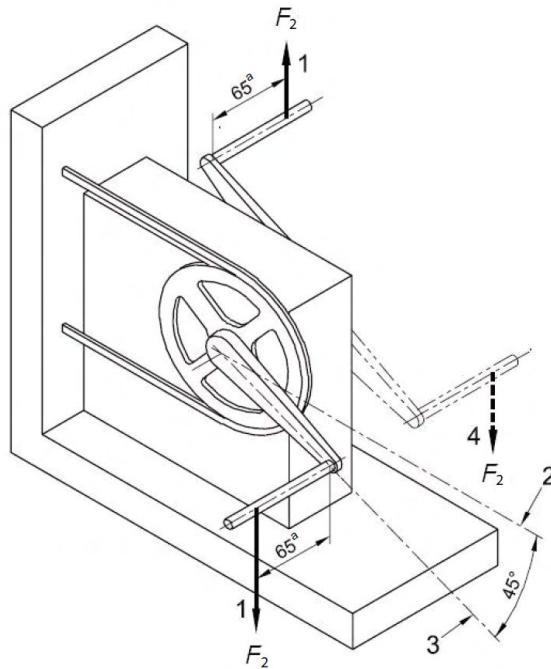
Schematic showing fatigue test arrangement as specified by ISO 4210 [22];
